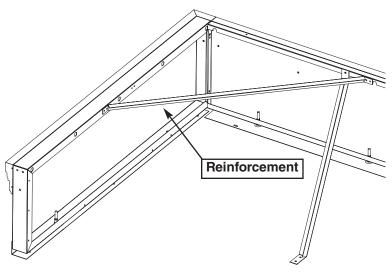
A. Install Facade Reinforcement to Side Facade and Front Facade
